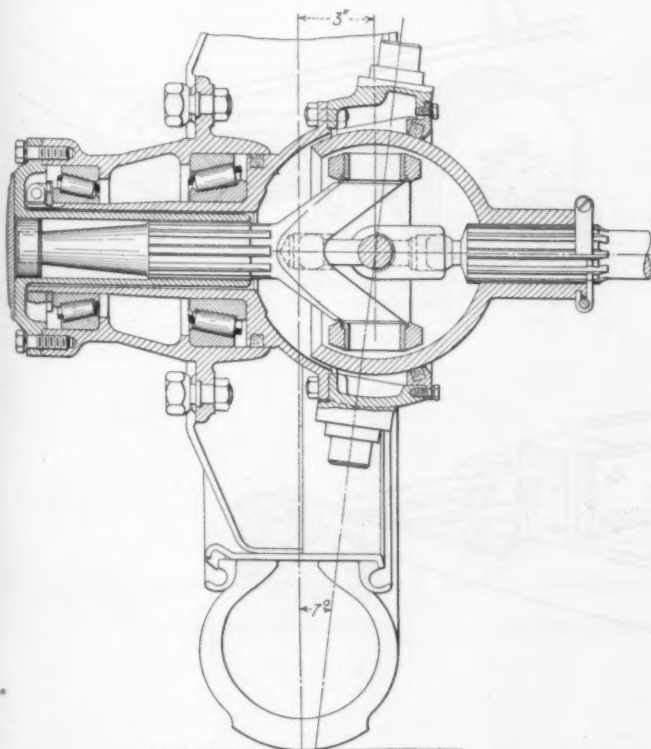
HEALEY-AEROMARINE FRONT-WHEEL, STEERING-KNUCKLE, AND UNIVERSAL-JOINT ASSEMBLY
